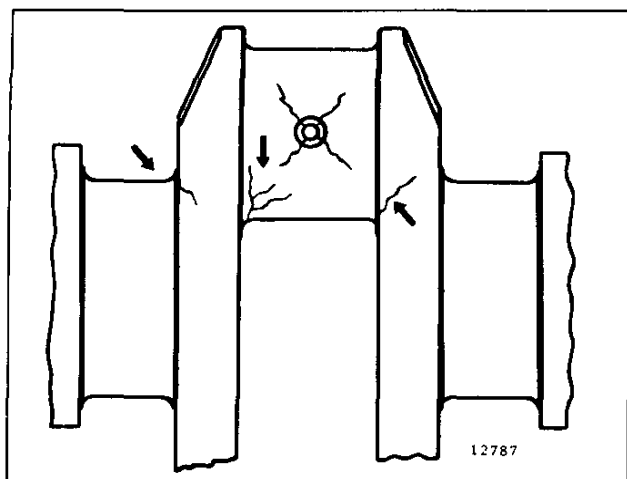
Crankshaft Fatigue Cracks
